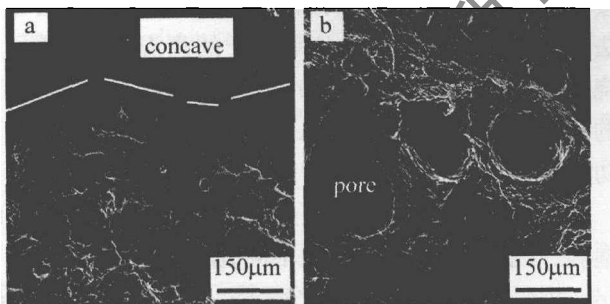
Fracture morphologies of laser weld No. 2
